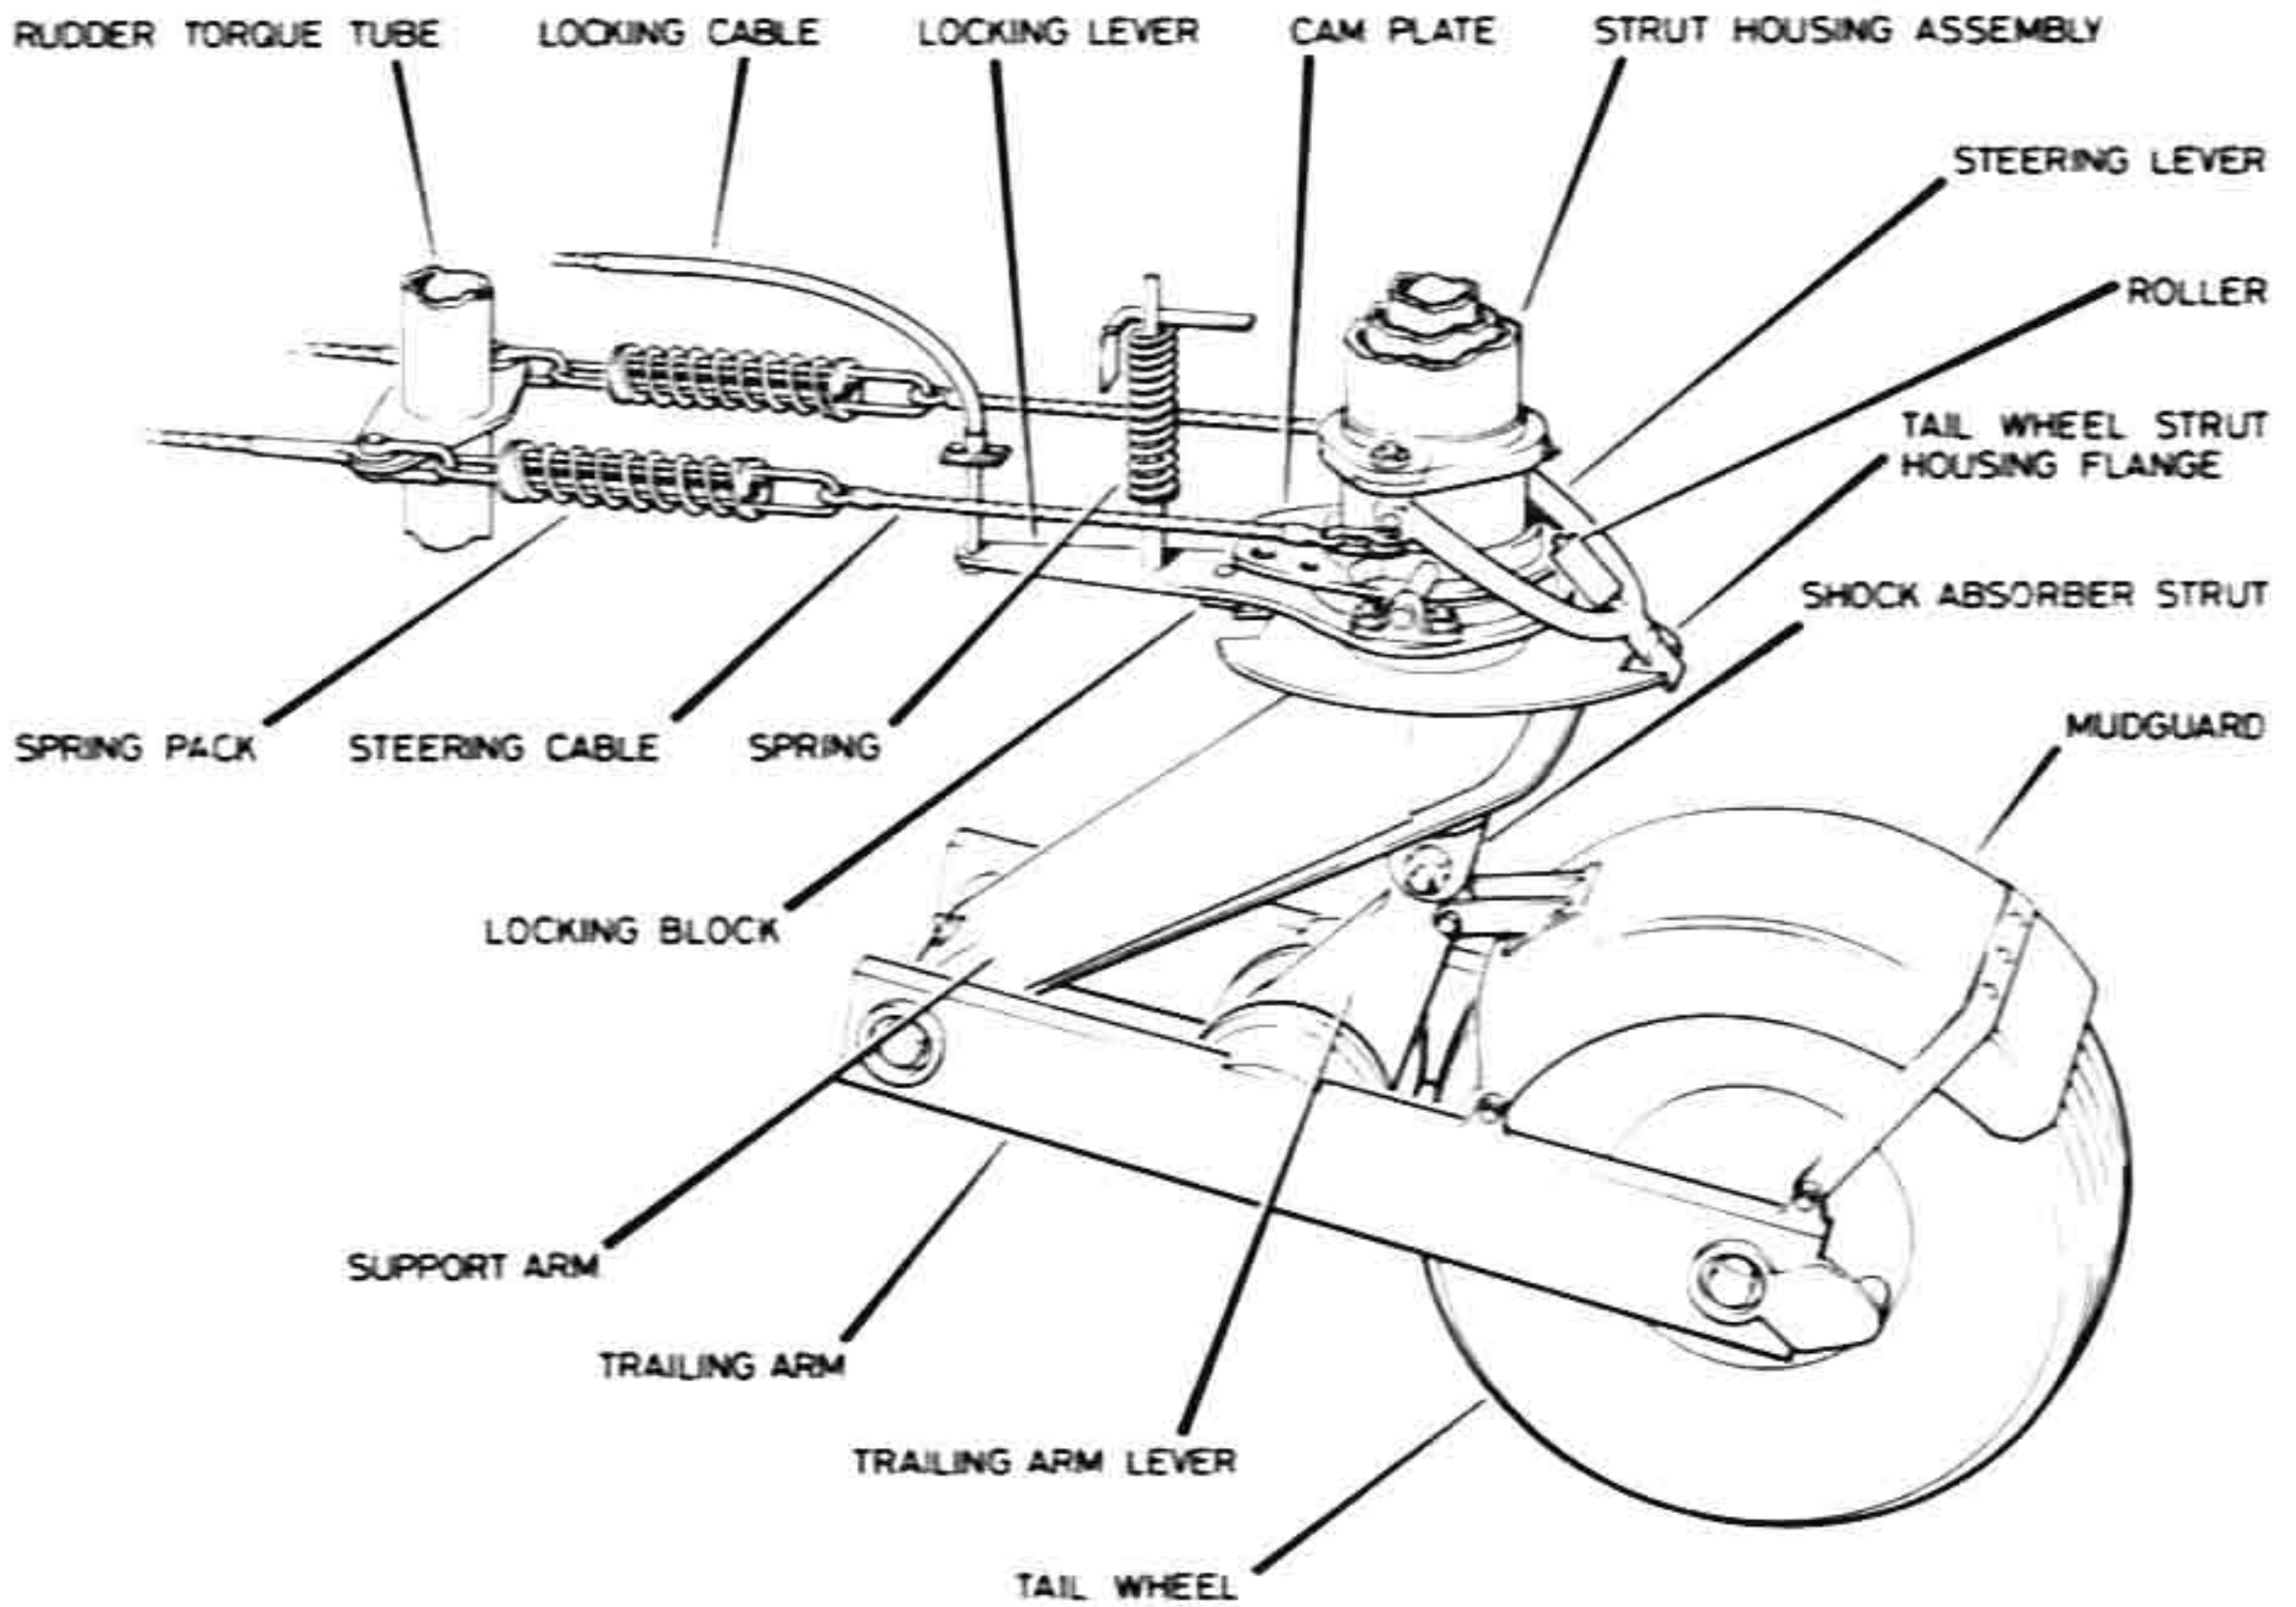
Tail Landing Gear and Steering Mechanism
